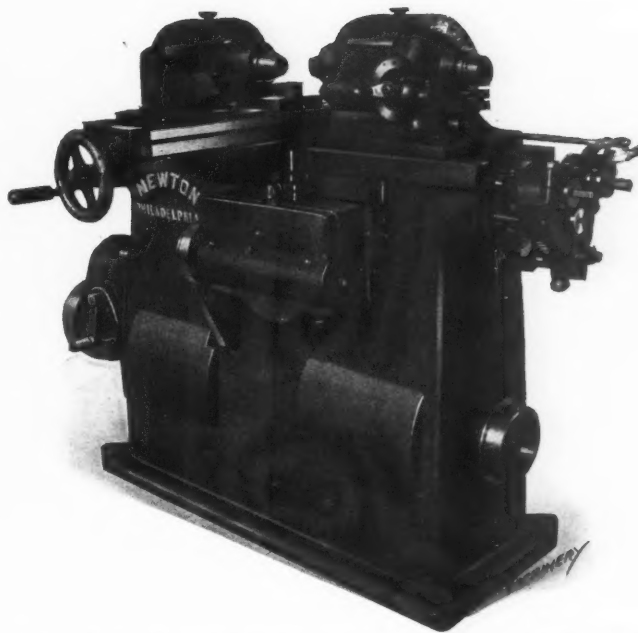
Duplex Keyseating Machine built by Newton Machine Tool Works
